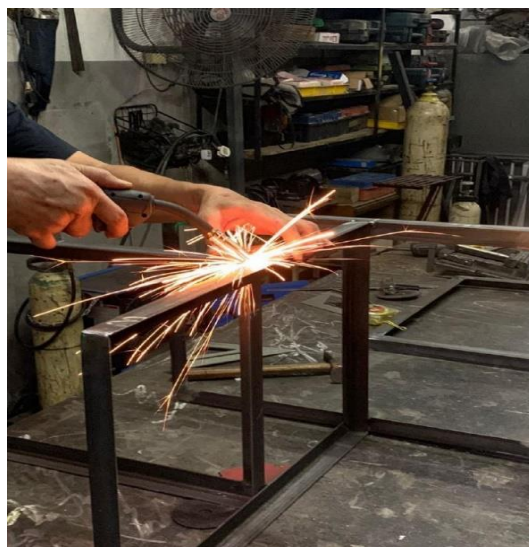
(i) Showing welding iron angle becomes a structure.
